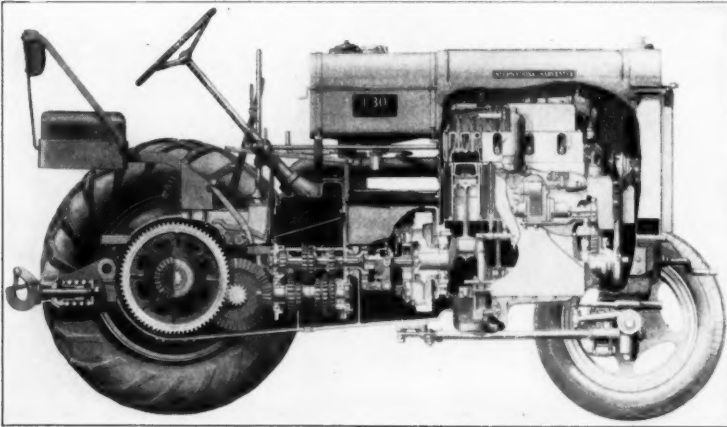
The International tractor as equipped for circulating splash lubrication of the engine, and bath lubrication of the gearing.
